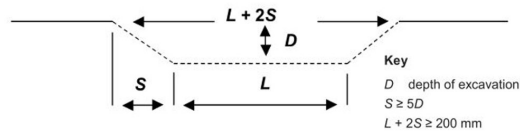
Schematic of the weld prep used to generate the welding path taken from BS 15594:2009 [11]
